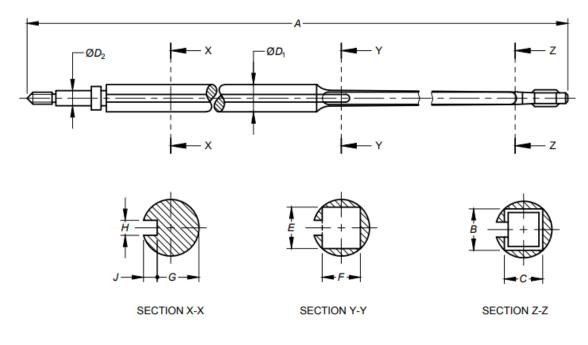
SPINDLE FOR JUTE COP WINDING MACHINE
